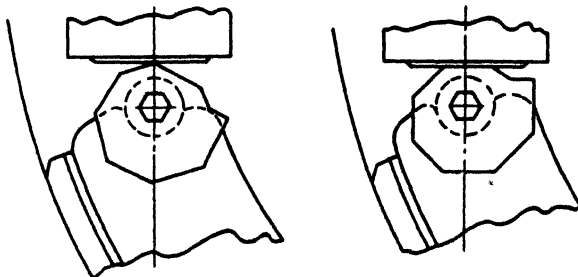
POLYGON ADJUSTER FOR HYDRAULIC BRAKES.
